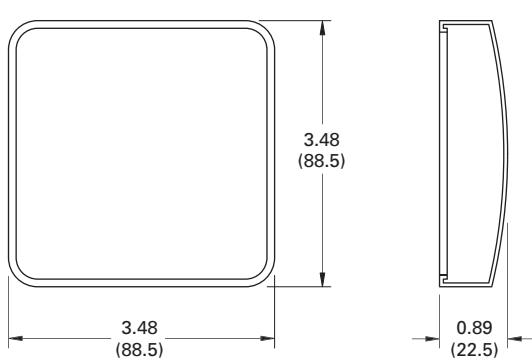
EZD-XS-80 and EZD-XM-80 Series Dimensions in Inches (mm), Drawing Number MD05013009E
